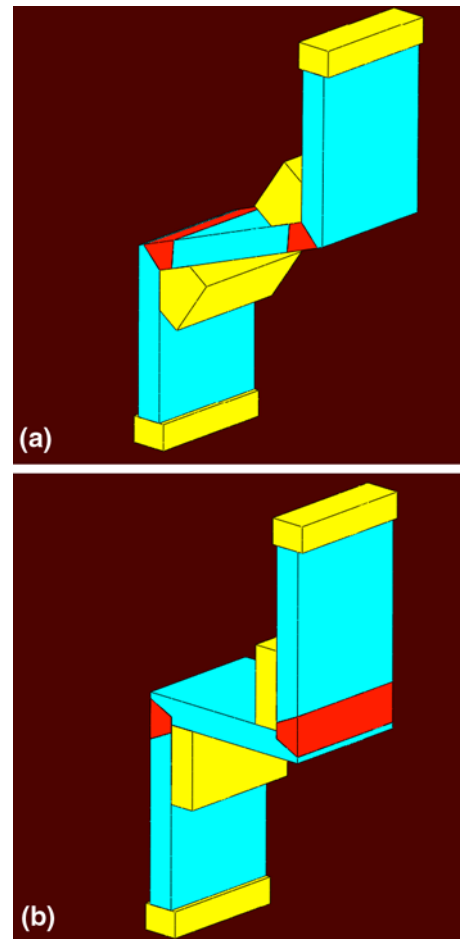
(a) Original weldment design requiring complex fixturing and non-orthogonal clamping forces; and (b) a modified design requiring simple fixturing, orthogonal clamping, and geometrically simpler components
